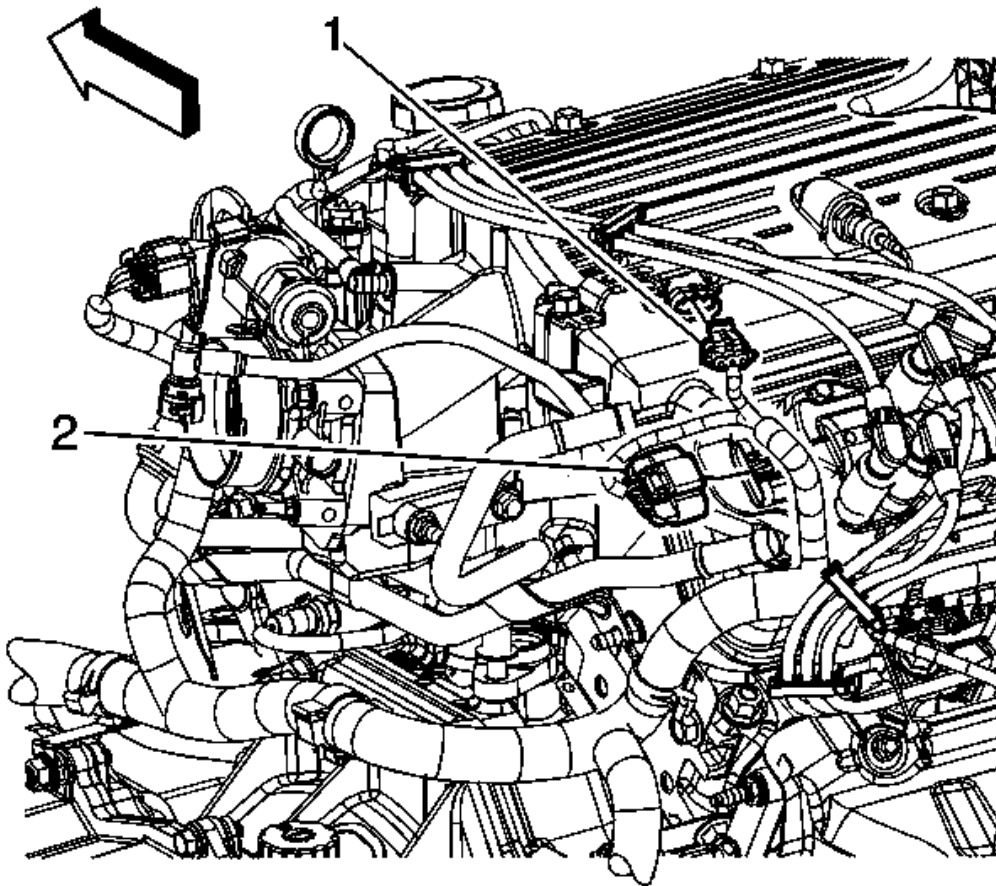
Identifying Engine Wiring Harness Electrical Connector
